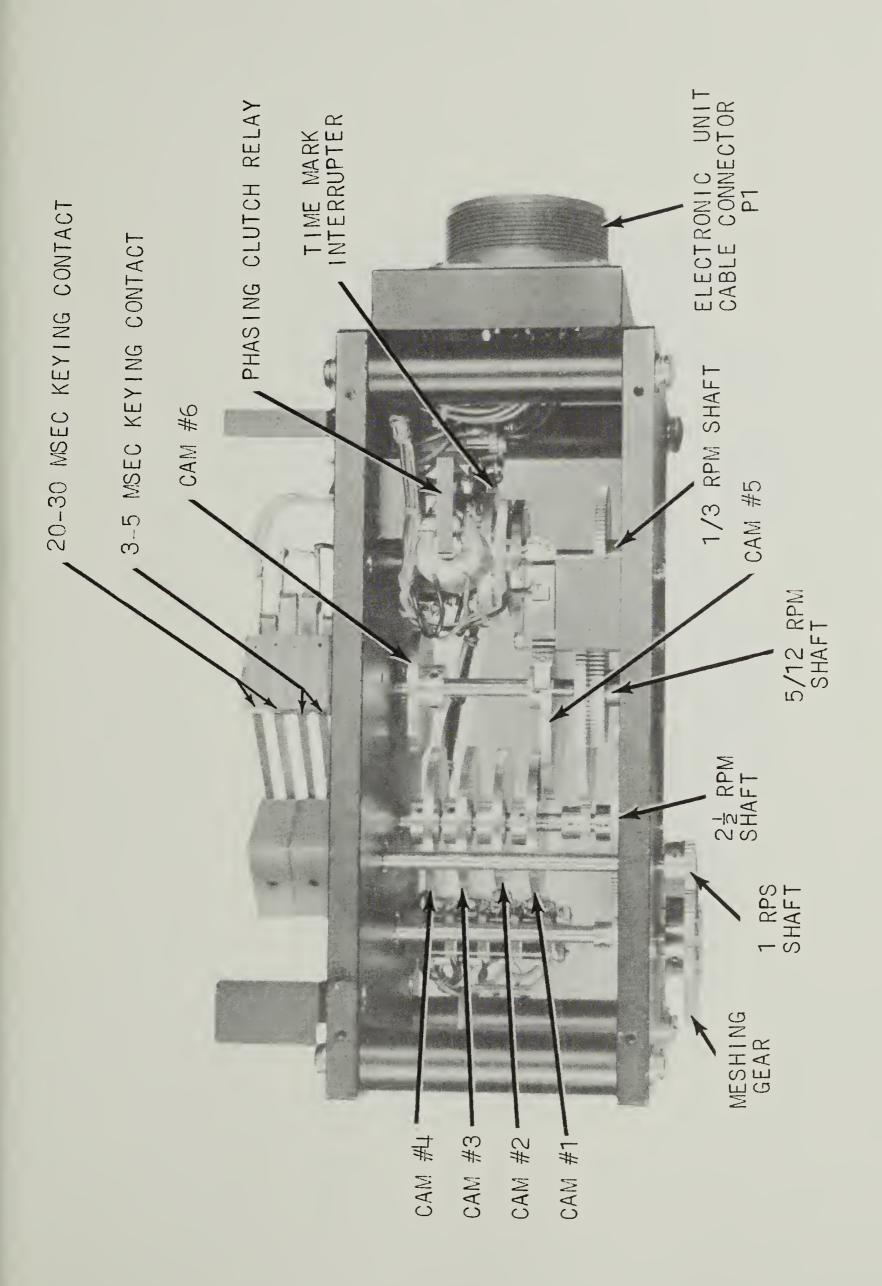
PROGRAM ASSEMBLY TOP VIEW
